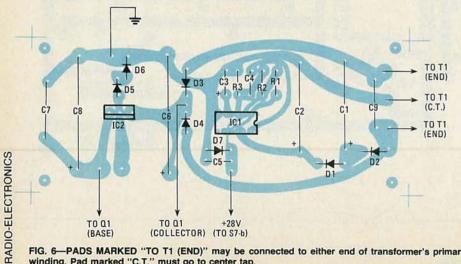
PADS MARKED "TO T1 (END)" may be connected to either end of transformer's primary winding. Pad marked "C.T." must go to center tap.
